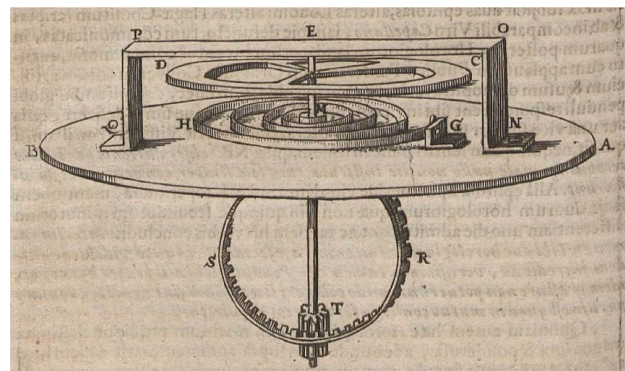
Balance wheel-spiral spring oscillator drawn by Huygens in Ref. [1]
